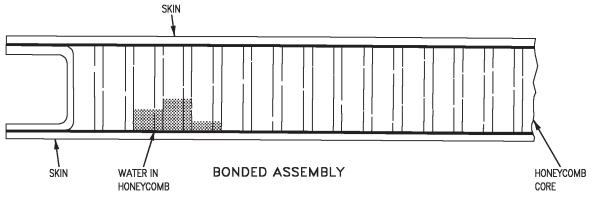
Examples of Defects That May Develop in Laminates and Bonded Honeycomb Assemblies (Sheet 1)
